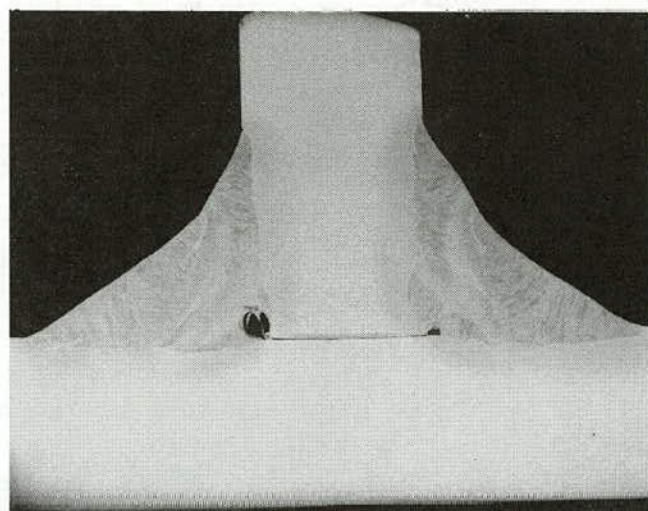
Macrosection of fillet weld soundness test for weld W79, air plasma-cut edge on Grade 36 plate, 12.7 mm (½ in.) thick, welded by FCAW. Original mag. $\times 2.5$; as shown $\times 1.75$.
